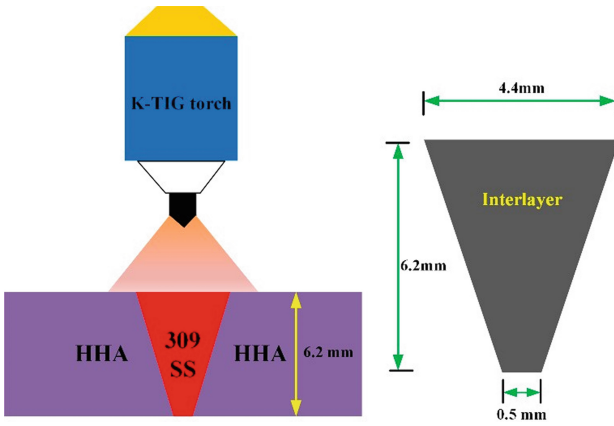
Schematic of the K-TIG welding process in combination with the interlayer [5]
